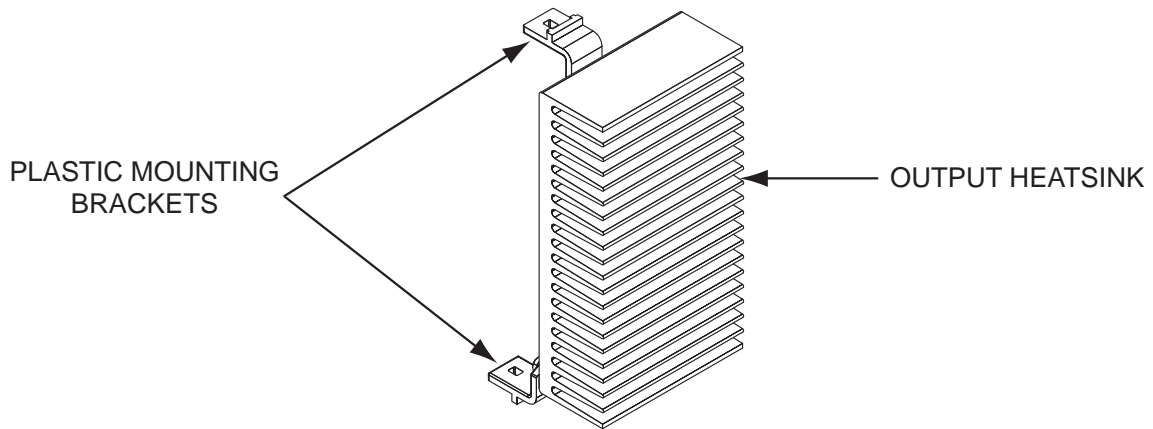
OUTPUT RECTIFIER PLASTIC MOUNTING BRACKETS
